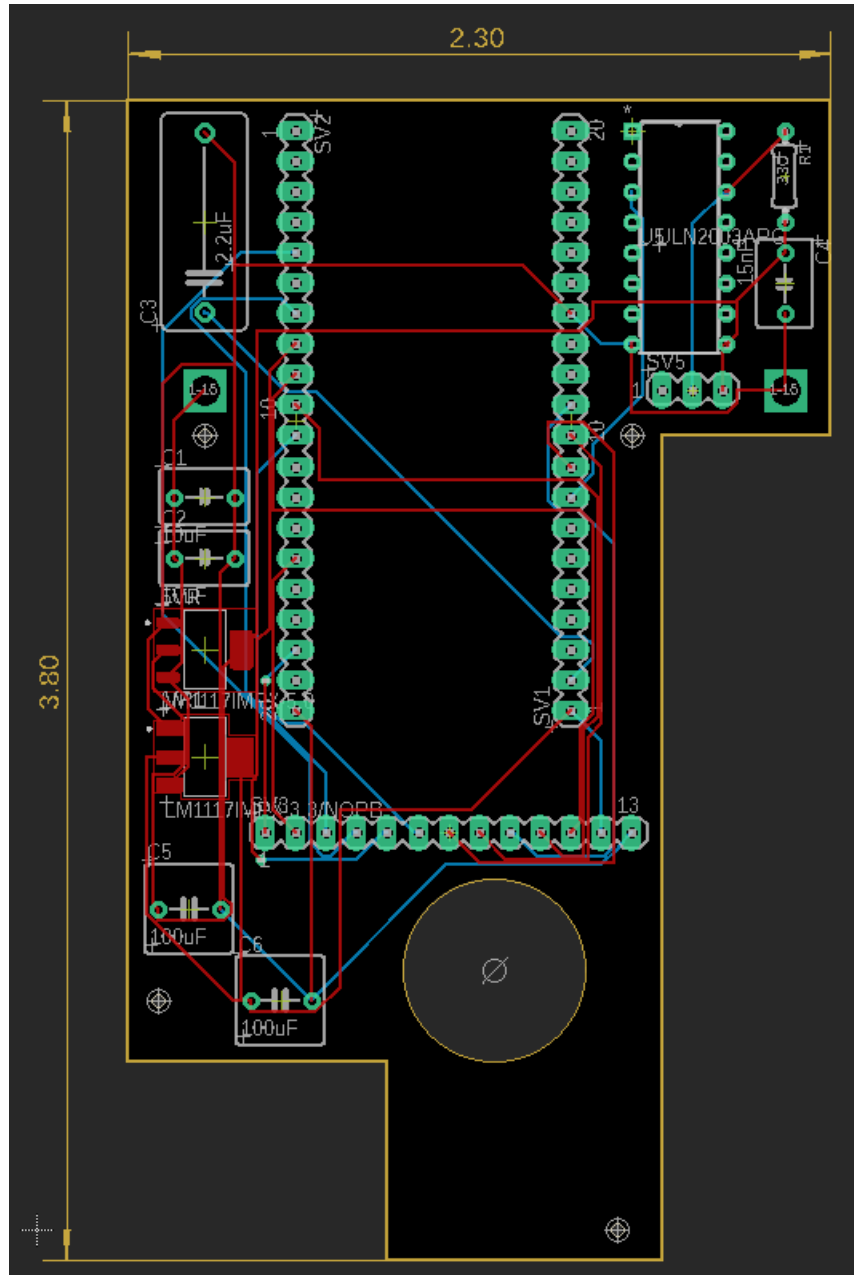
PCB board that will be connected to the Inside Portion of the SOLAS system (in inches)
